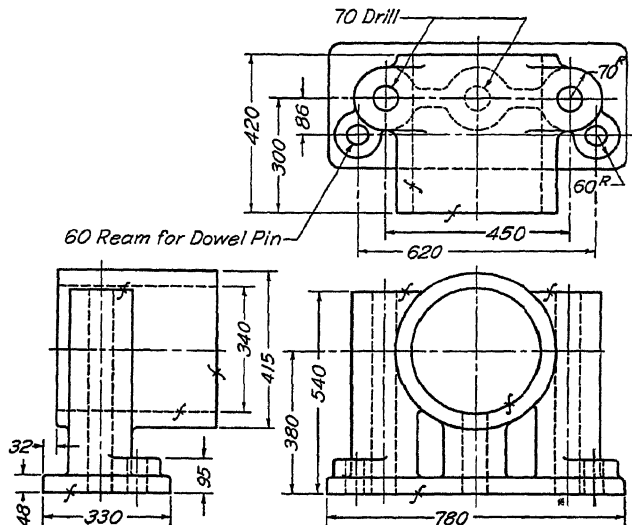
A metric drawing (front camshaft bearing, Hispano-Suiza aero-engine).
